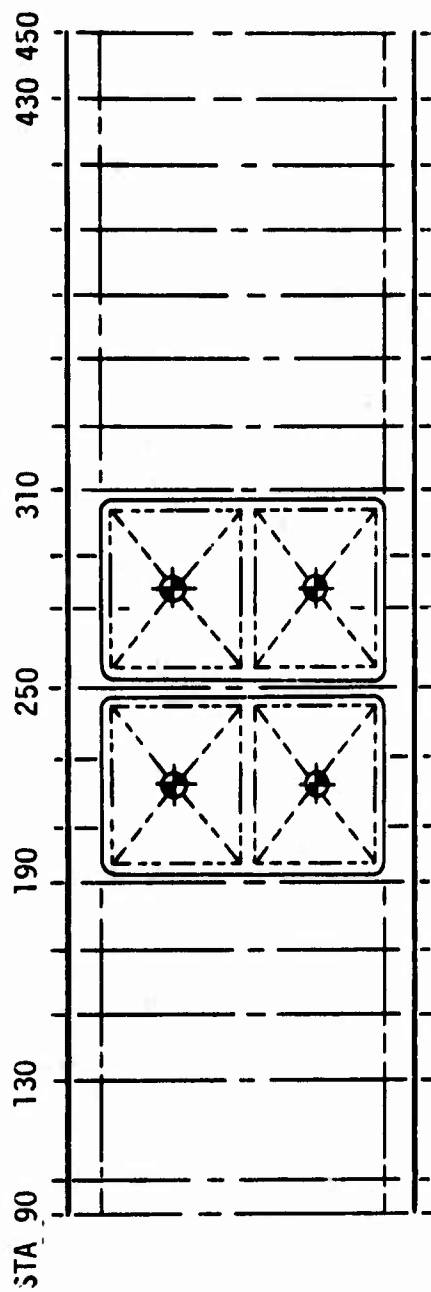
(U) Structural Arrangement for Double Row of Four 40 x 48 Cargo Pallet Exits.
